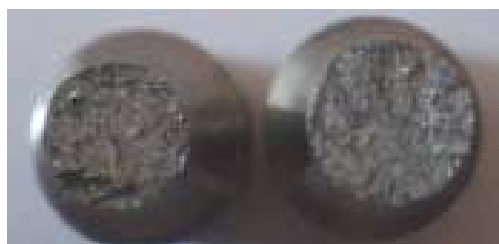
Appearance of fracture surfaces of the specimen for the testing of contraction in z-direction
